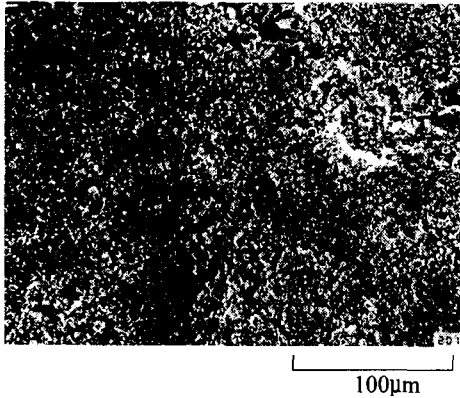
Finished surface in dry machining of the ceramic presintered at 1100°C with P10 tool
